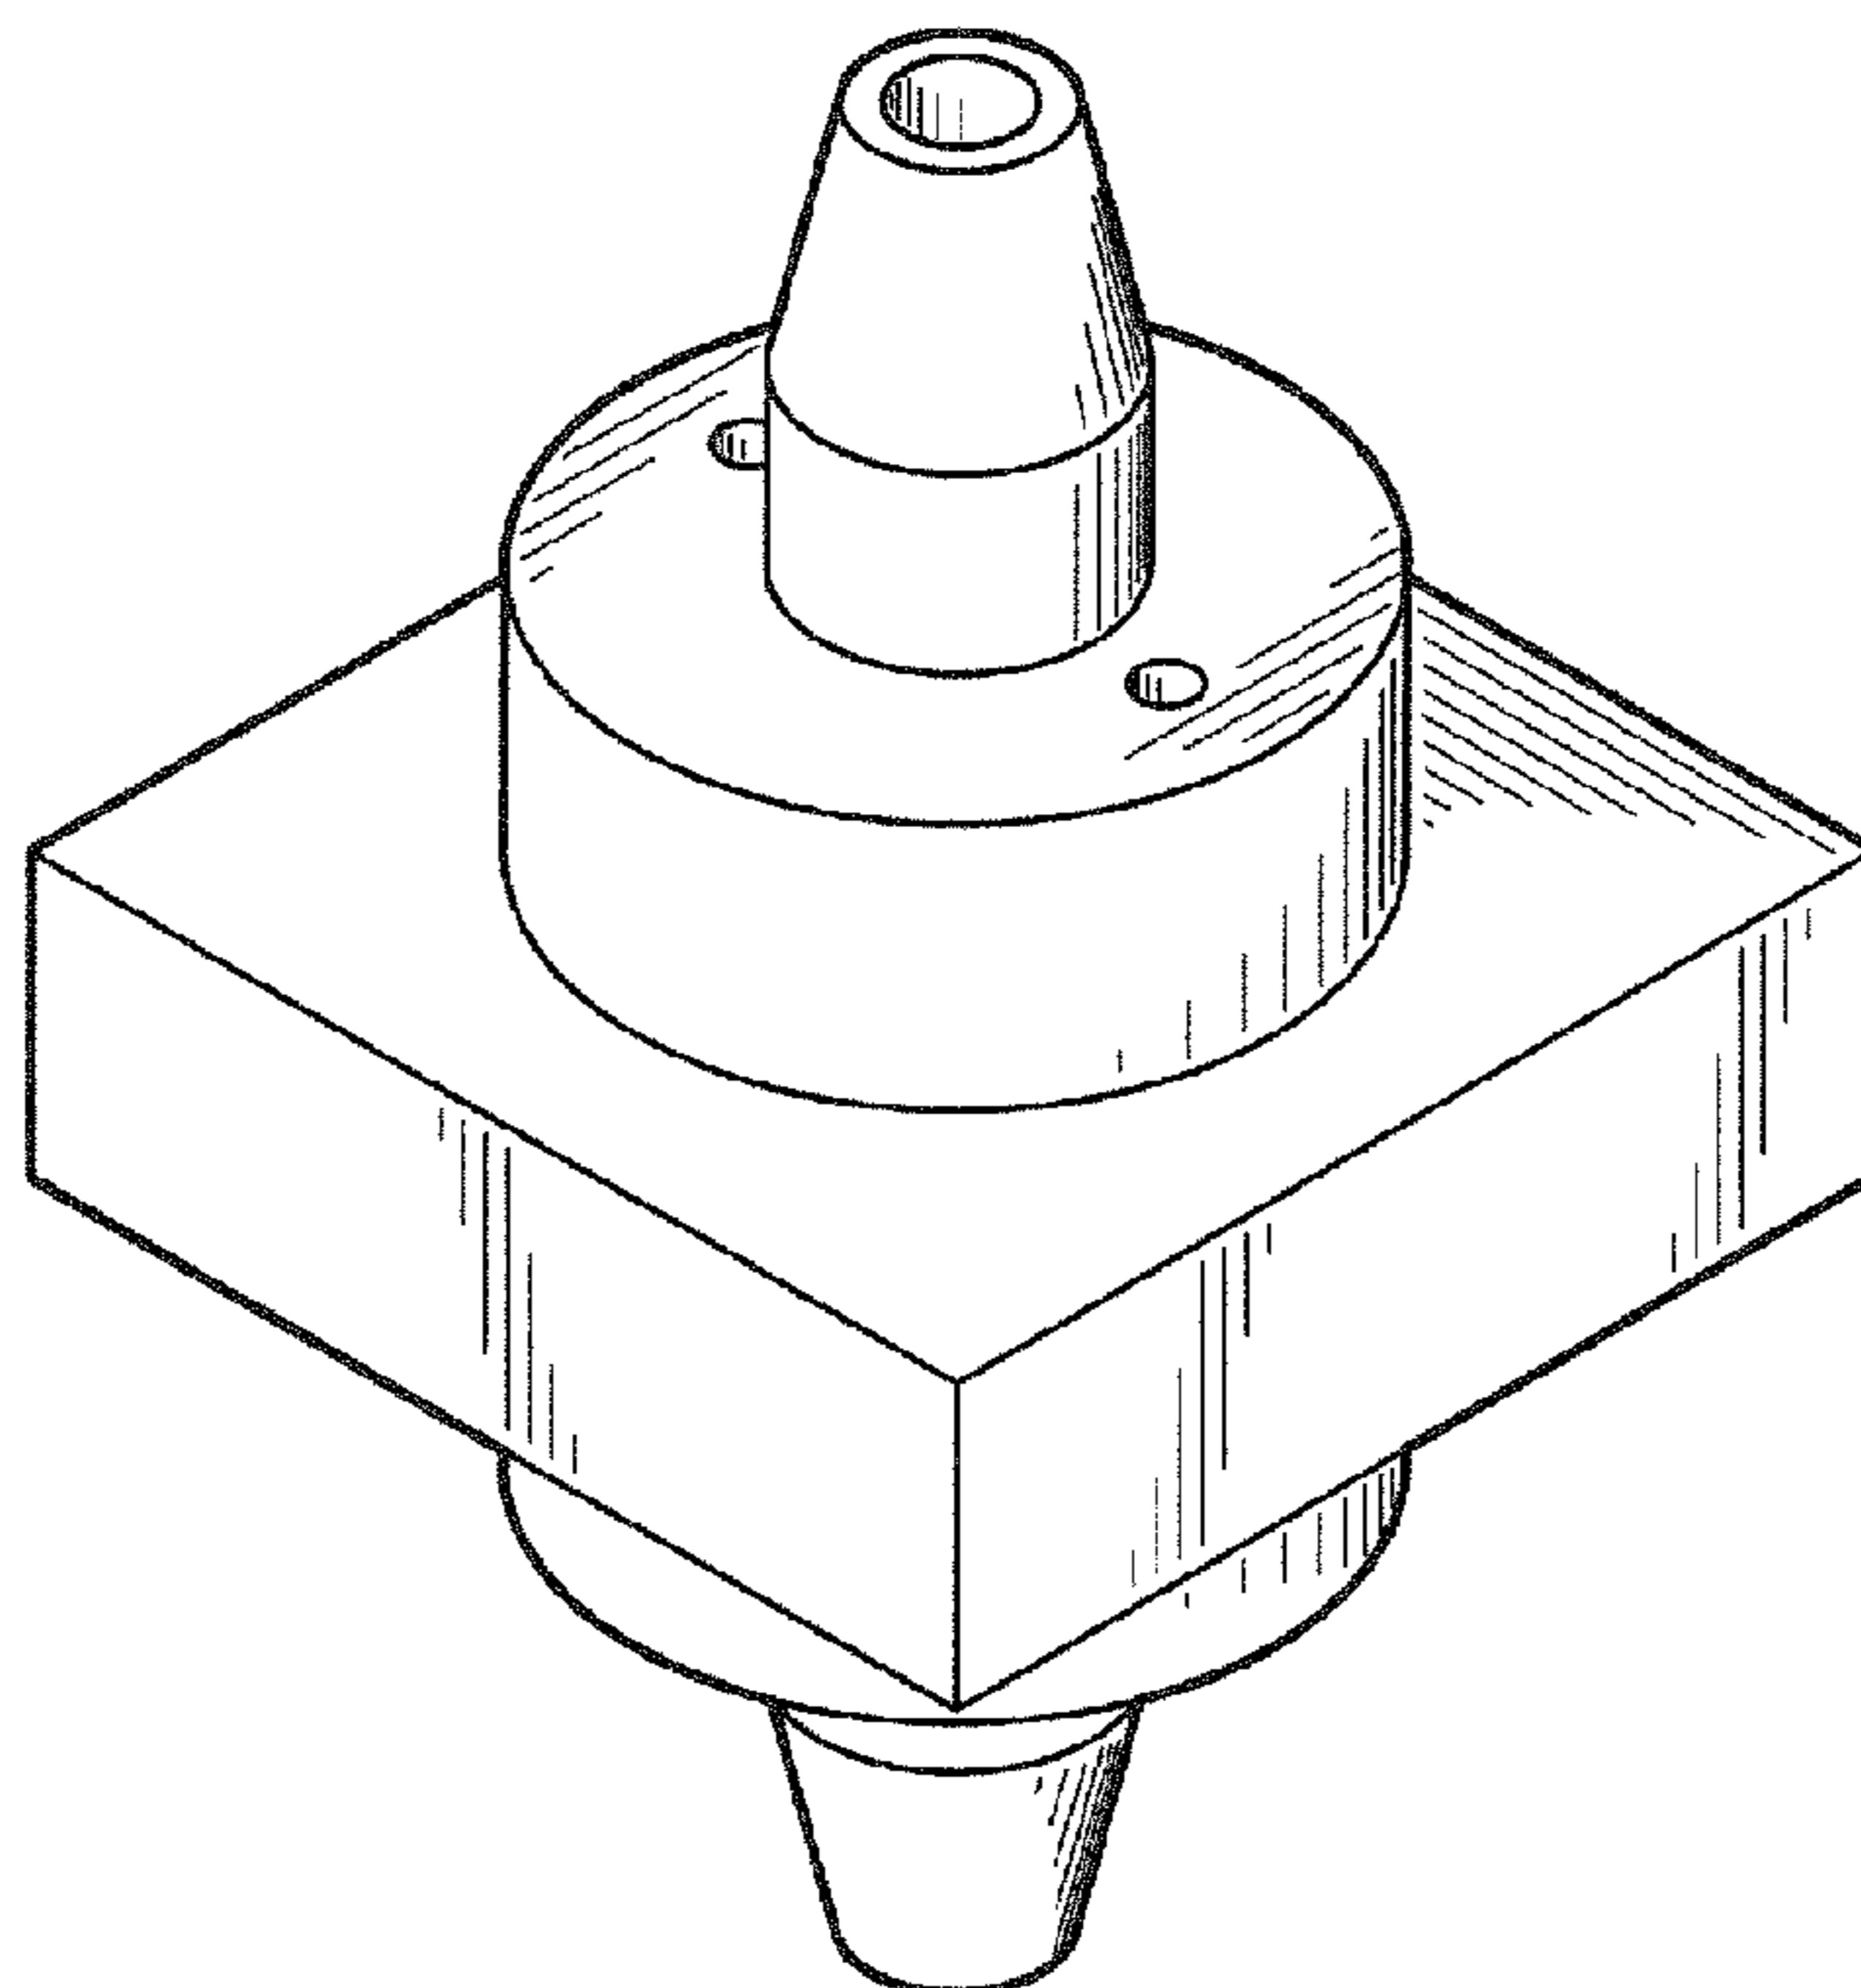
is a top and front and right side perspective view of the container cap with hose connector showing our new design, the bottom and rear and left side perspective view being a mirror image thereof;
